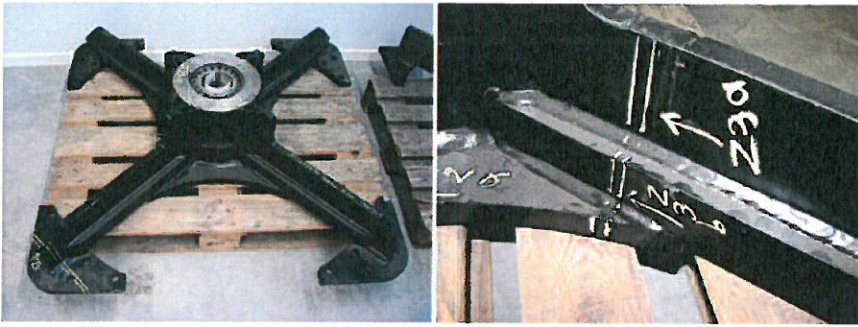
• HF900 bearing house. Left: original design; Right: a detail of the critical point for fatigue crack initiation at the star-shaped reinforcement.
